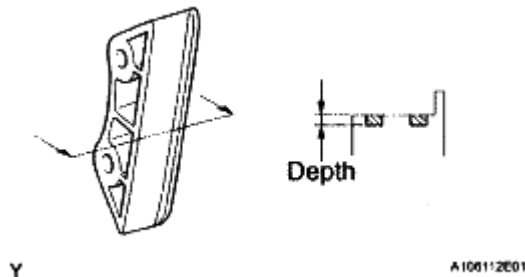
Identifying Worn Depth Of No 2 Chain Vibration Damper
